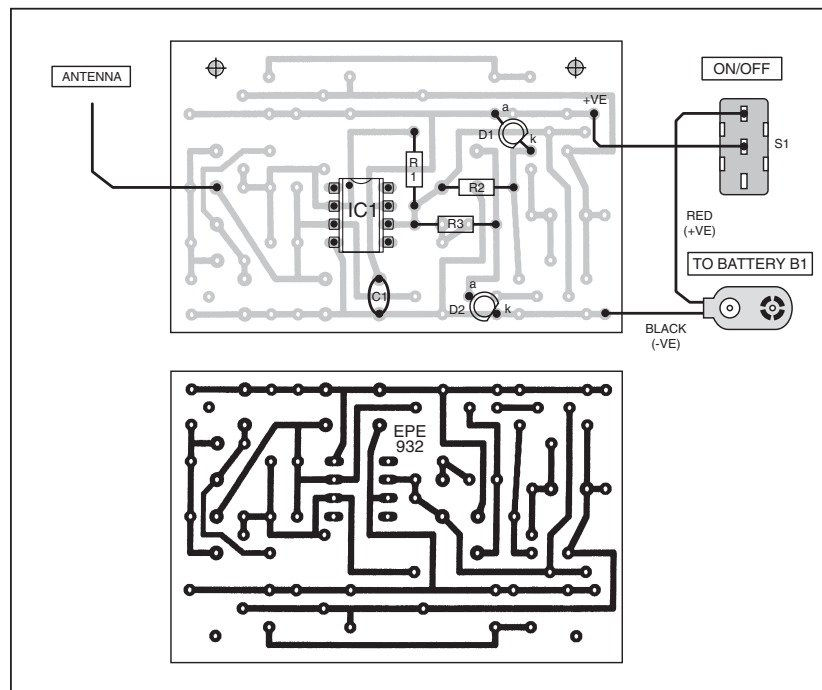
Component layout on the multi-project printed circuit board and full-size copper foil master. Double-check layout as not all holes are used.
